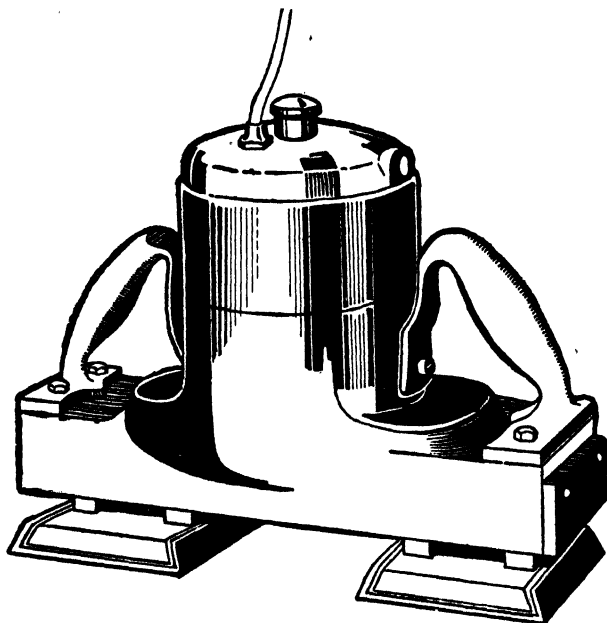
One Type of Electric Rubbing Machine. Used by Furniture and Auto Finishers. It Does a Better and Faster Job Than Hand Methods.
